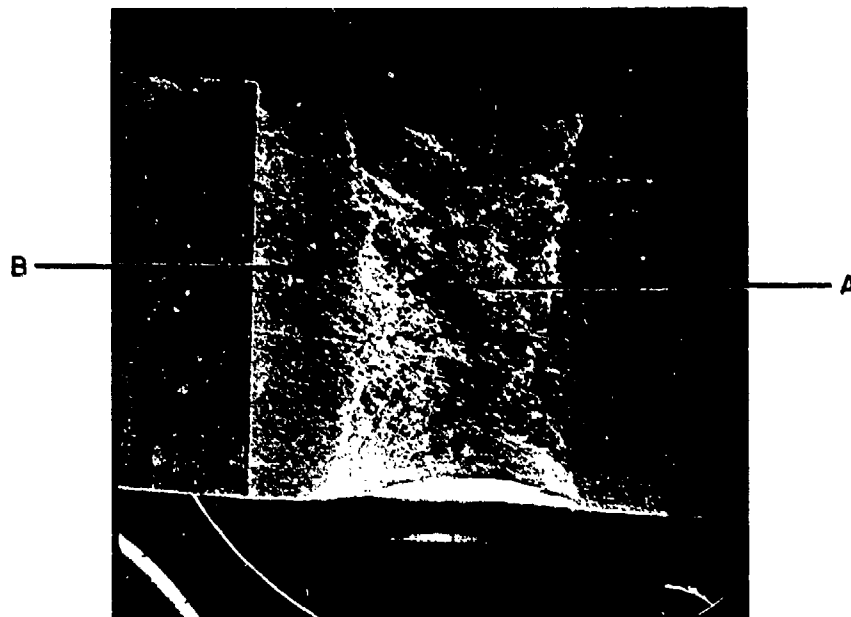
Fatigue fracture surface of an A-514 steel plate specimen, 10x.
